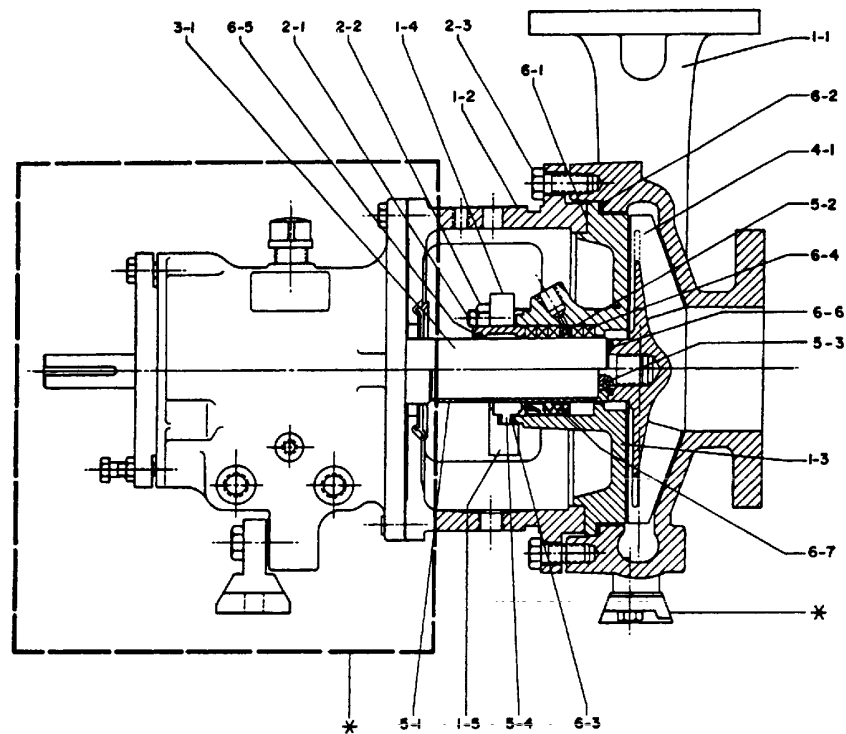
TYPICAL TYPE A OR C PUMPS (NC AND ND-3400)
